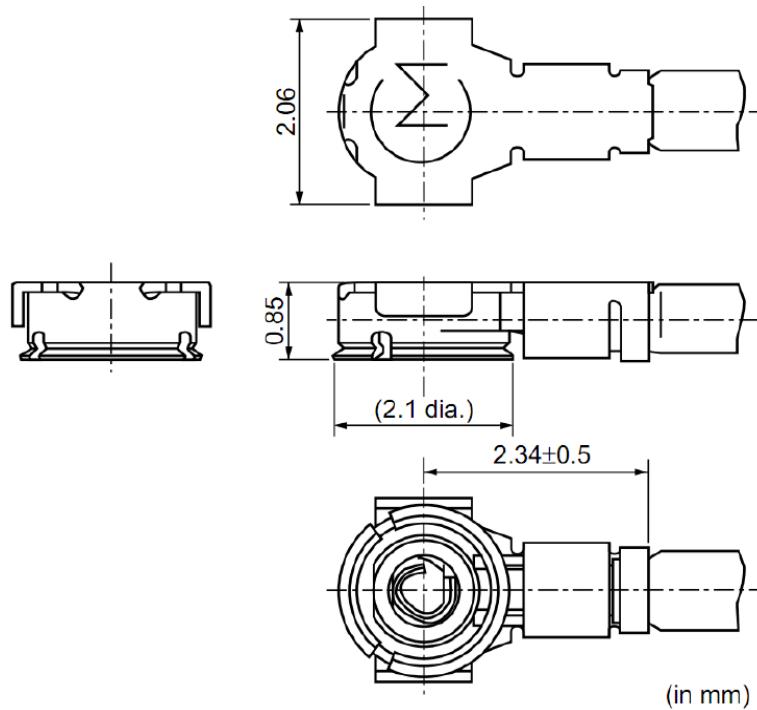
Dimensions of Mated Plugs (\varnothing 0.81 Coaxial Cables) (Unit: mm)
